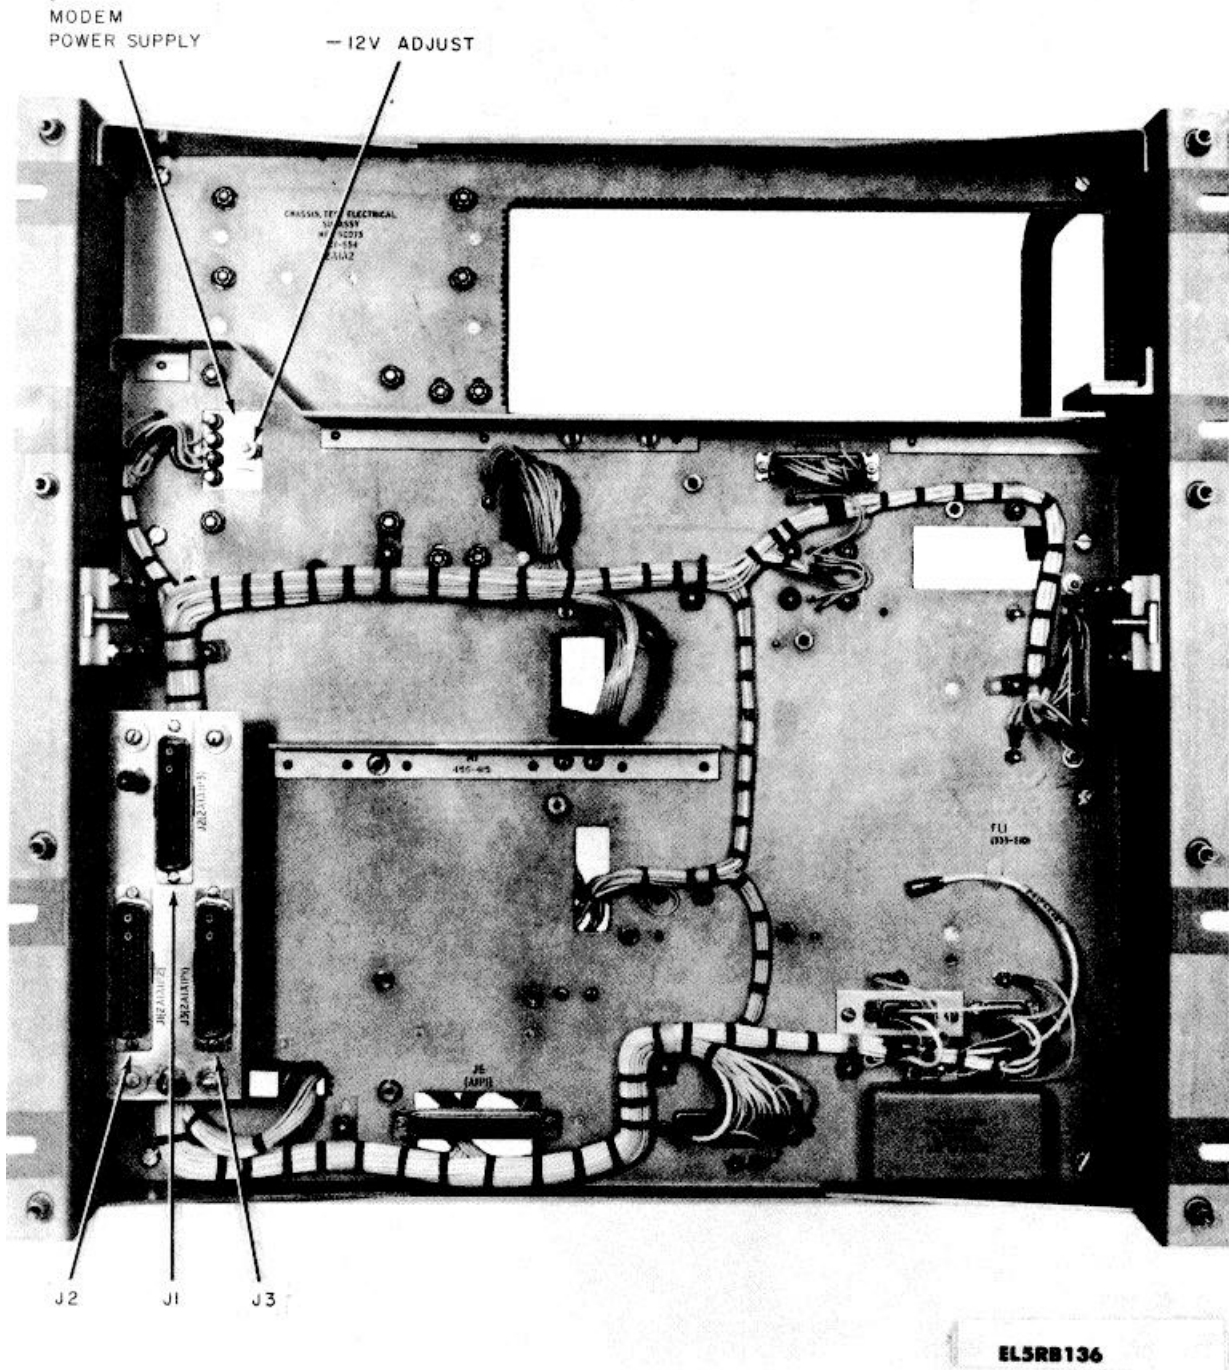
Receiver Test Facility Rear Chassis Front View.
